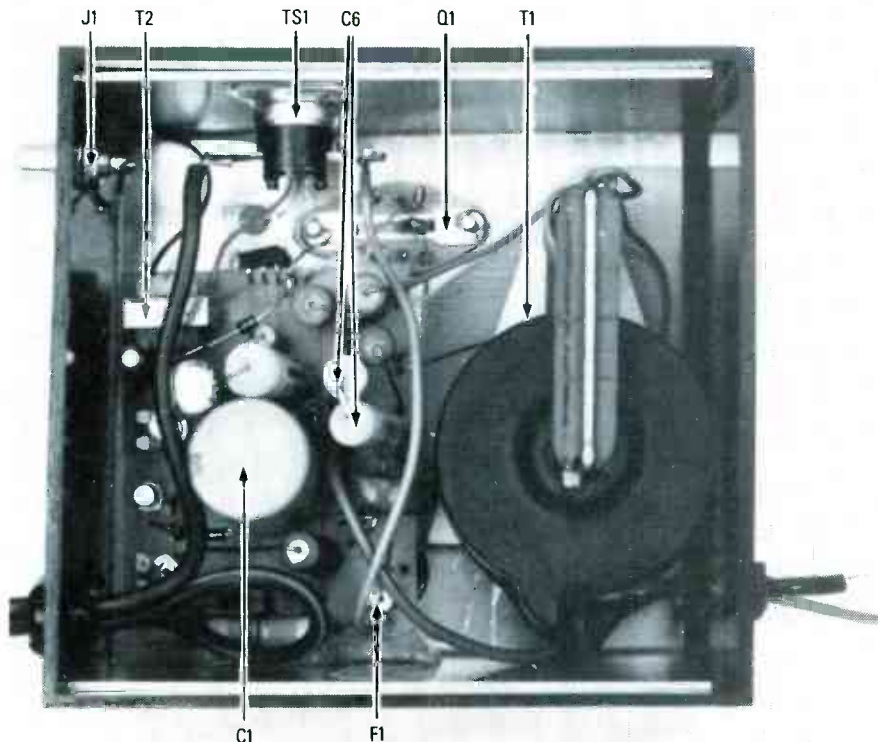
THE ACTUAL PROTOTYPE. Notice that it is virtually a duplicate of the layout shown in Fig. 5.
